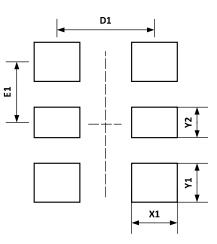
SWPM201 5032 and 3225 package) PCB Land Pattern
